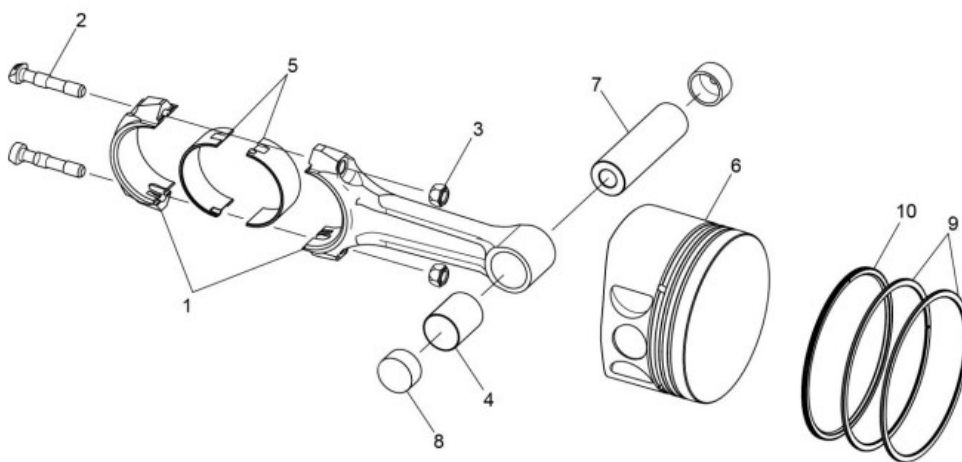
View of the piston assembly of a IO-360 engine [66]
